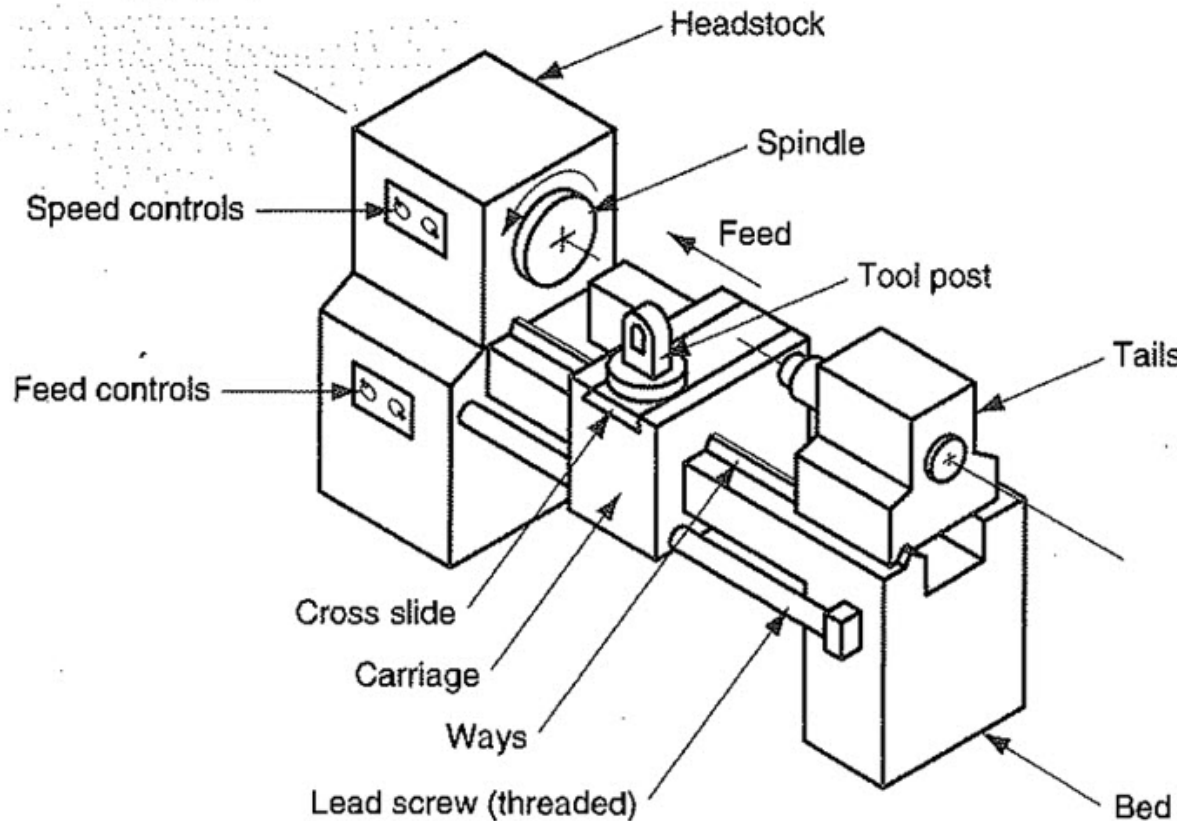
Diagram of an engine lathe, indicating its principal components.
